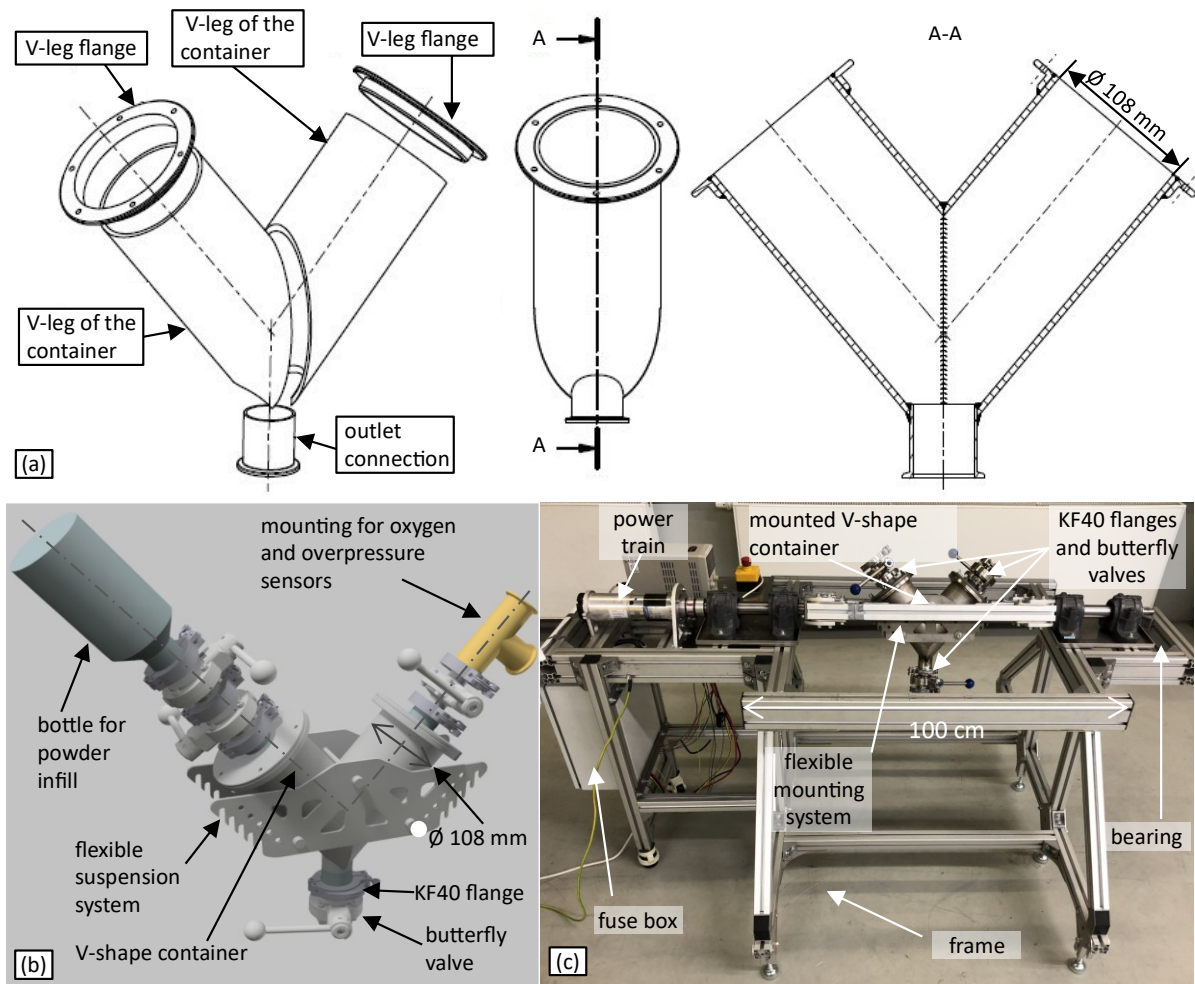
a) technical drawing of the V-shape container and its cross-section; b) CAD-Image of V-shape container with integrated mountings and c) image of manufactured blender test rig.
